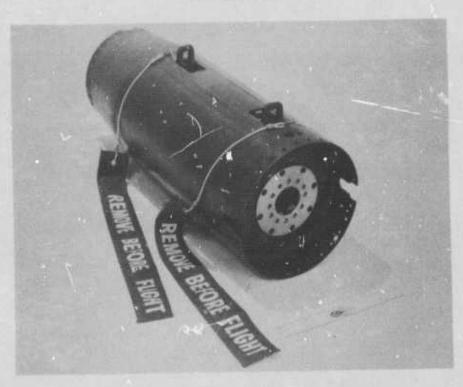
Fuel Tank Assembly with Bladder and Collector Pipe Installed.
